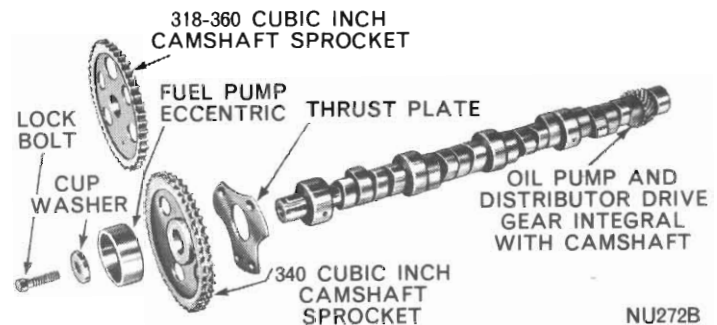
Camshaft and sprocket assembly (Disassembled view)
